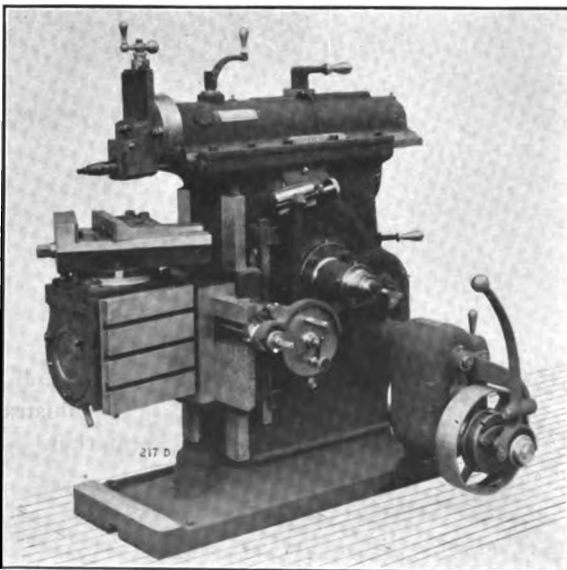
GEARED SHAPER, 16-INCH, WITH FRICTION CONTROL FOUR-SPEED DRIVE. AMERICAN TOOL WORKS CO.
